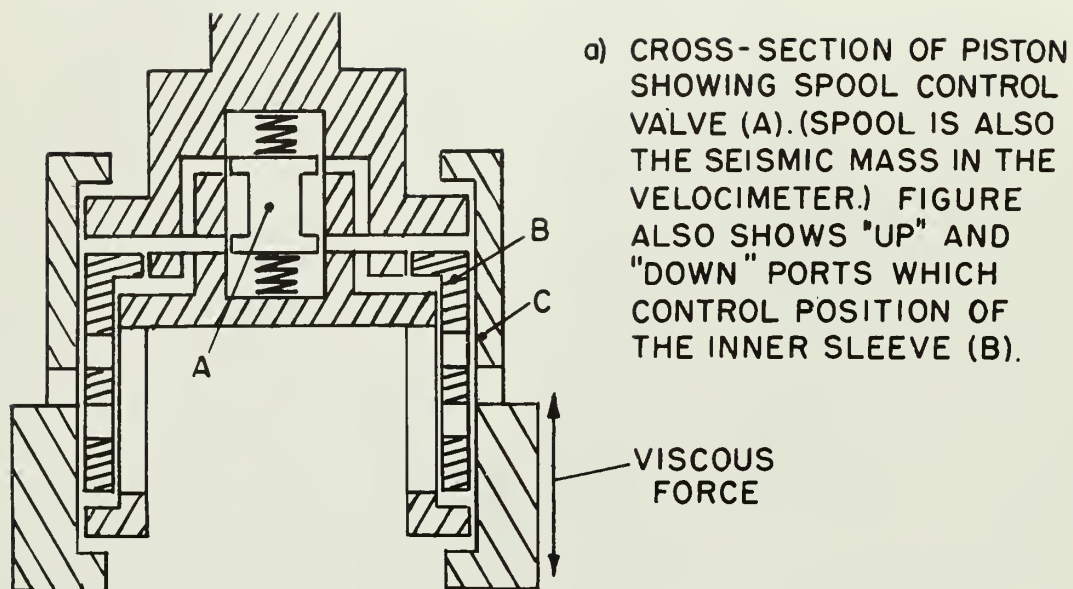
Cross-Sectional View of the Ideal Damper Piston, Sleeves, and Spool Control Valve
